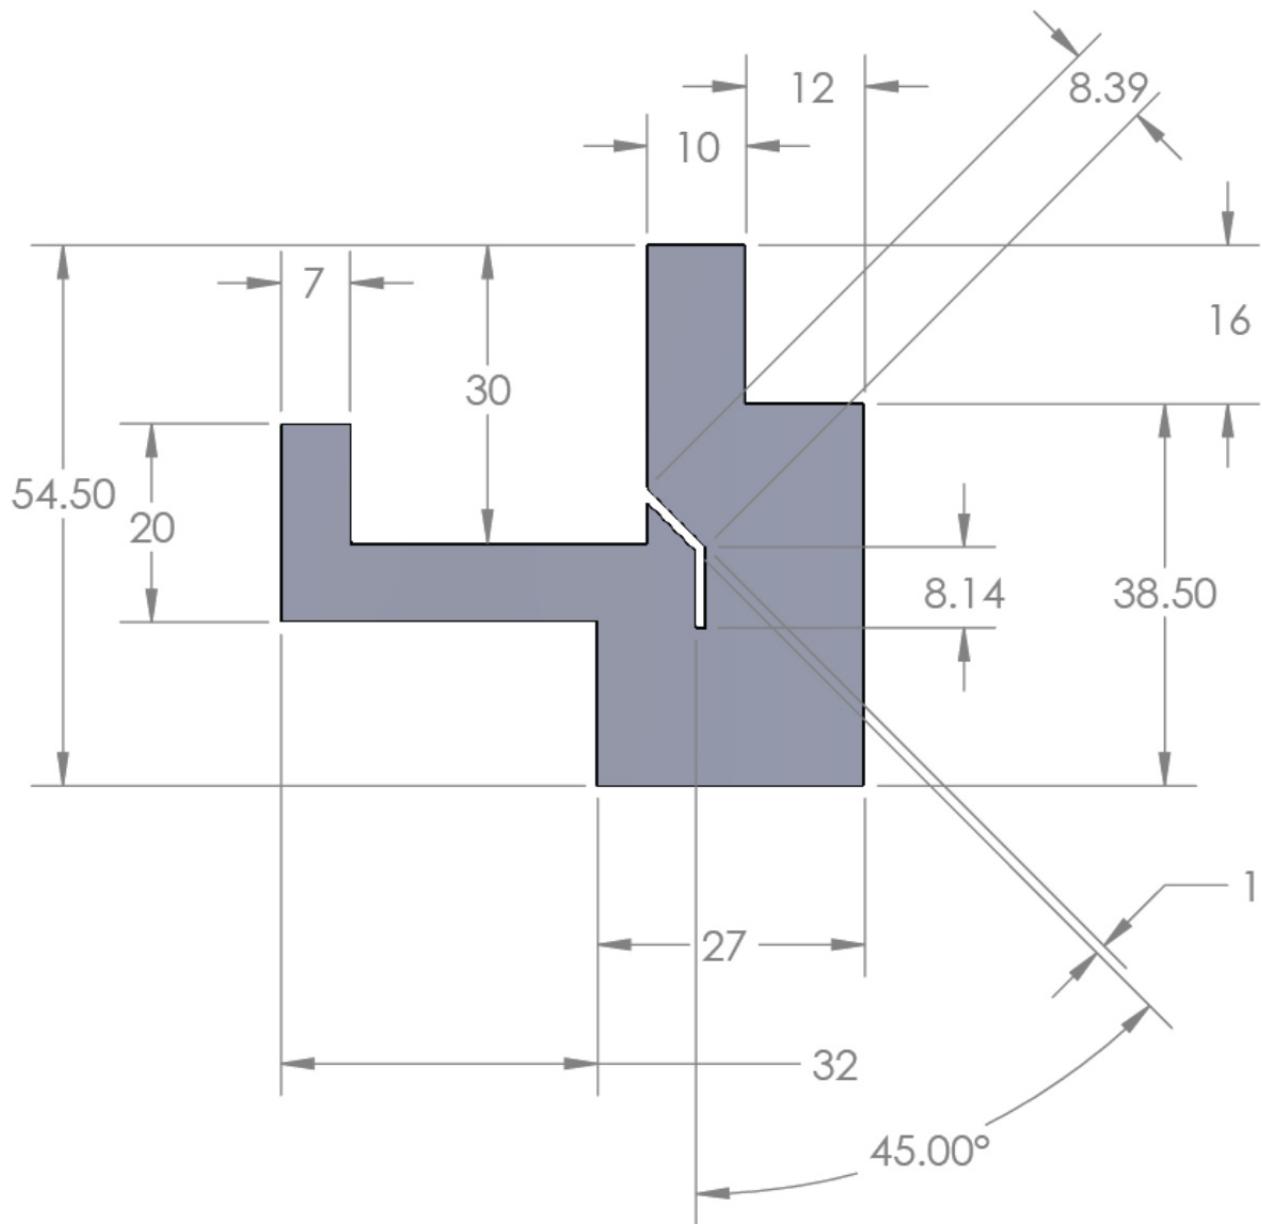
Heat Spreader Tape Stencil Dimensions.
